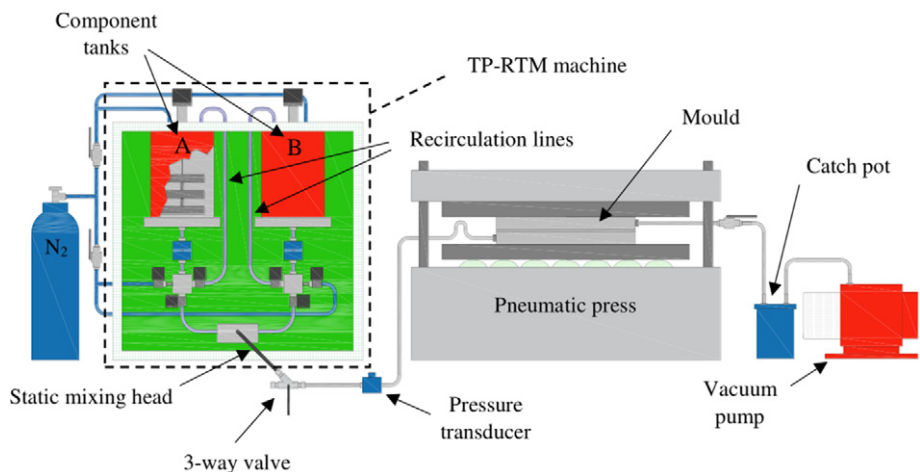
TP-RTM setup during injection including the TP-RTM machine, pneumatic press, closed mould, vacuum pump and catch pot.
